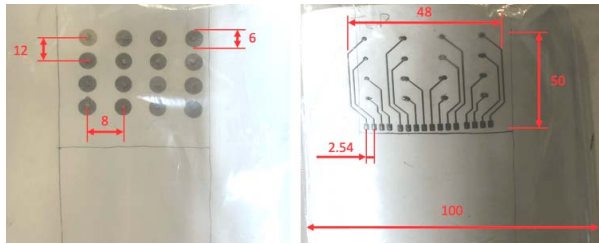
Final layout of the prototypes for inner and outer features (quotes in mm).
